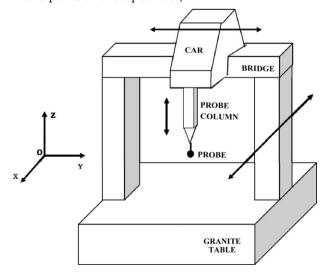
Constituent parts of a fixed working table and a mobile bridge CMM.
